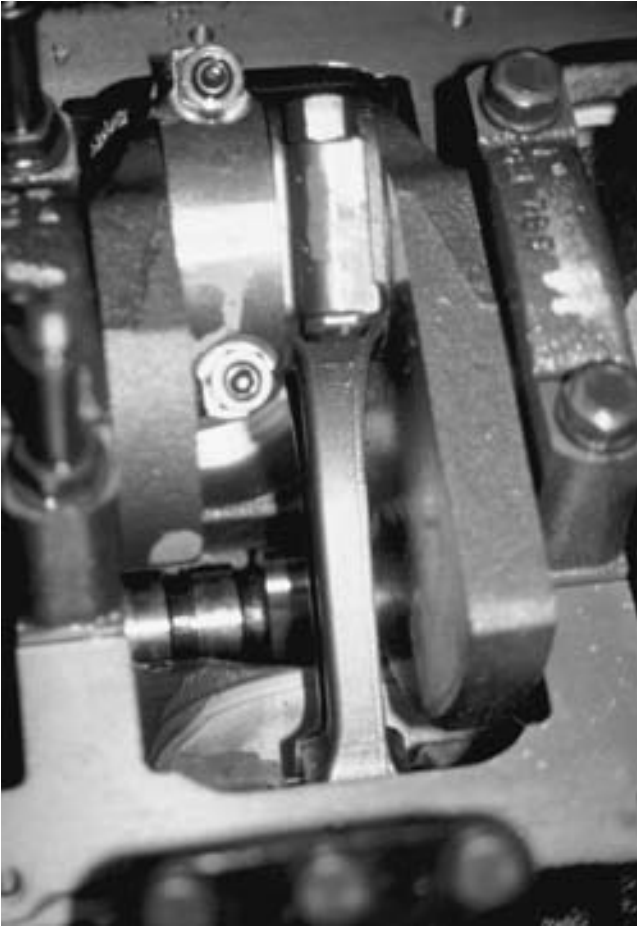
Powdered metal connecting rods can be identified by their smooth appearance.
